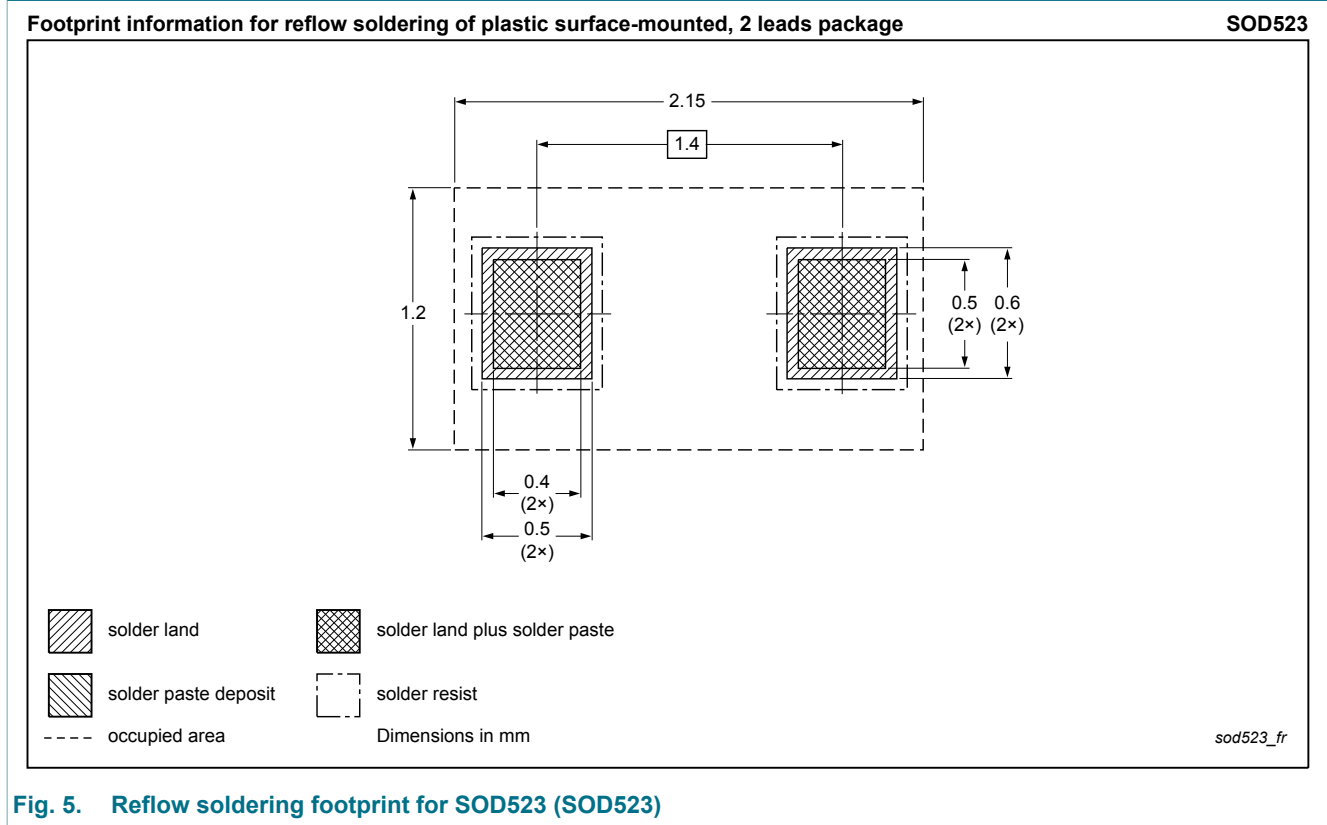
Reflow soldering footprint for SOD523 (SOD523)
